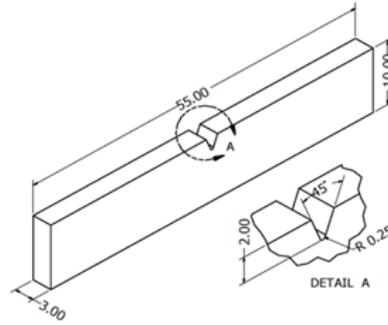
Dimension of sub size charpy test specimen (ASTM E23)
